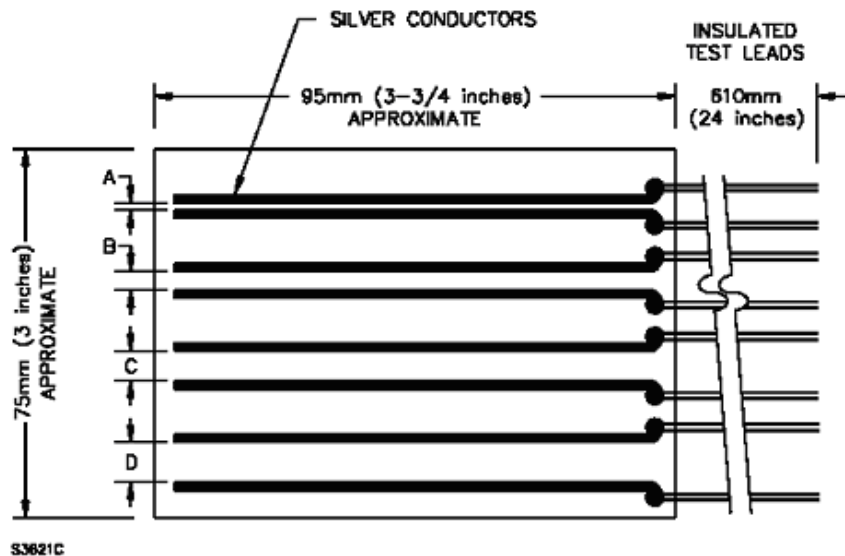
Schematic Design Guide for Test Boards as Contained in UL 796
